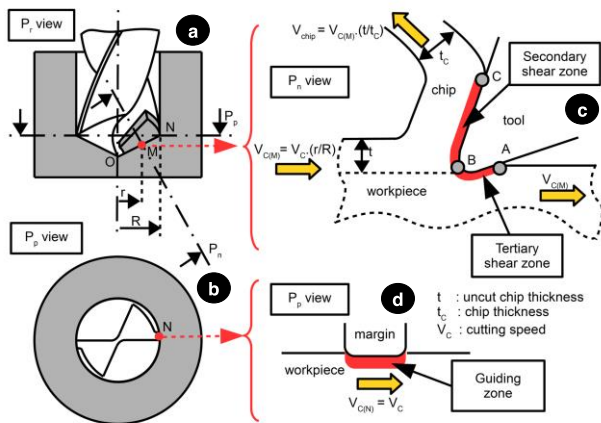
Description of various friction zones in drilling (inspired by [22]) a) P_r view of drilling operation b) P_p view of drilling operation c) Contacts along the cutting edges. d) Contact on the margins
